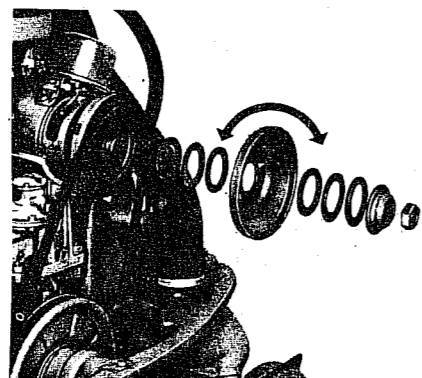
Adjustment of the drive belt is achieved by moving the spacer washers as shown.
